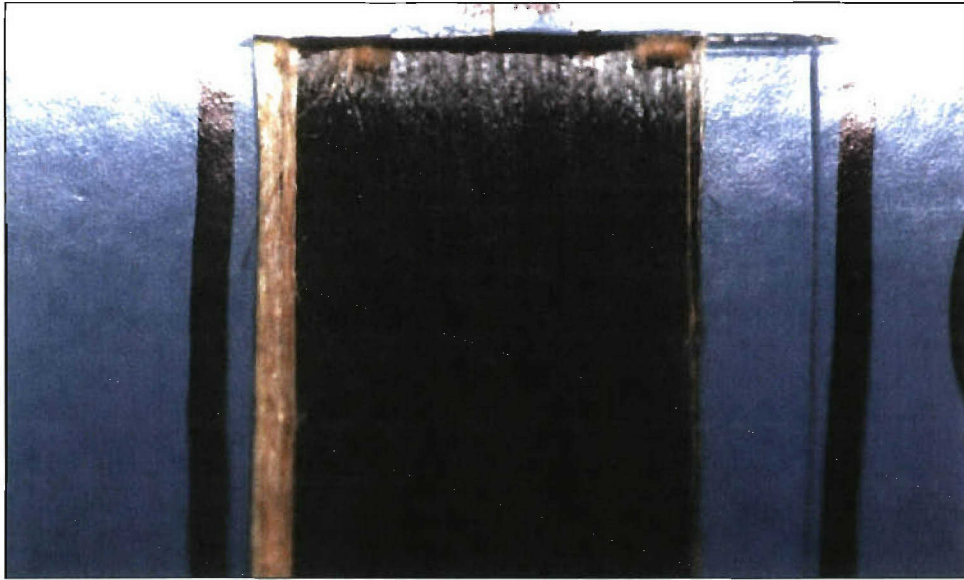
Area of Removal for Crack Inspection (View 2). (Removed width is 0.55 inch.)
